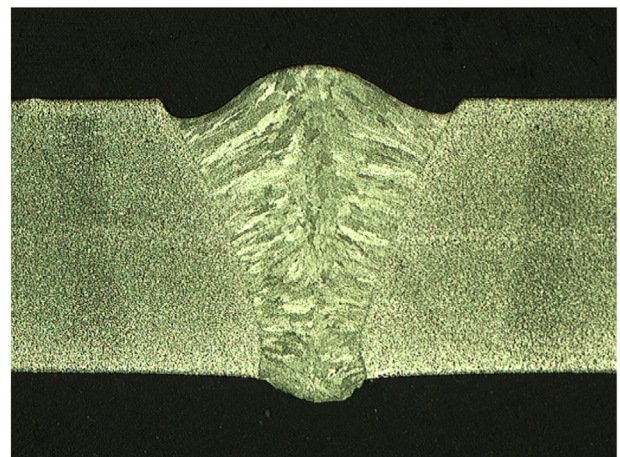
F-PA weld cross-sectional profile with undercut (130 A/150 mm/min).
